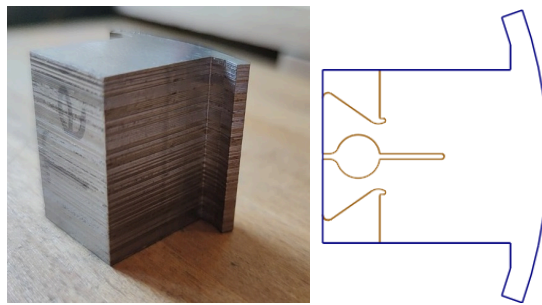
Left: Photo of a bonded rotor tooth before wire discharge cutting. The sample in the photo is shorter than the 120 mm tooth for the prototype. Right: Sketch of the shape the bonded tooth in blue, and the shape to be cut with electric discharge machining in bronze.
